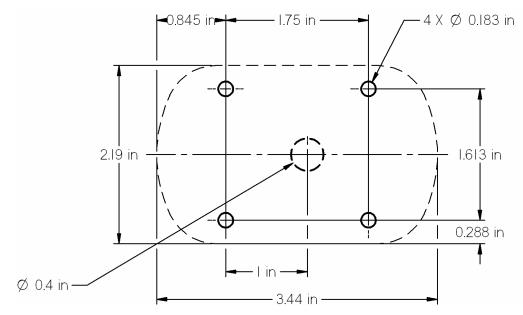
SV-GPS-250/2020 Mounting Dimensions
